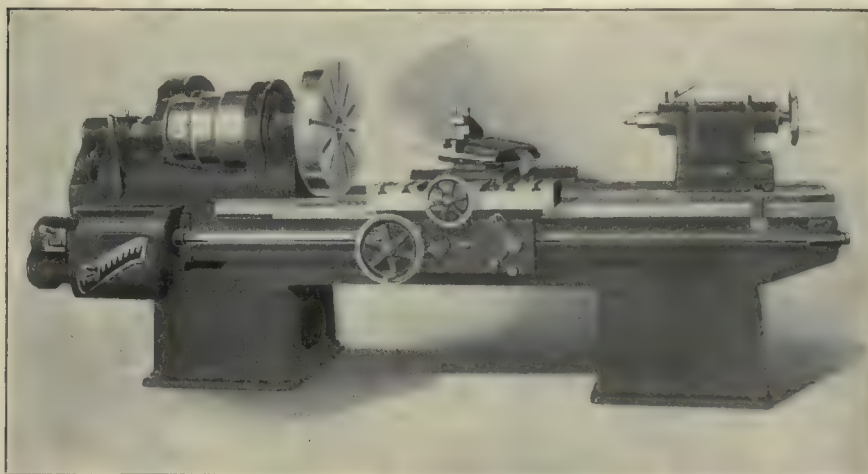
QUICK-CHANGE HEAVY-DUTY LATHE
